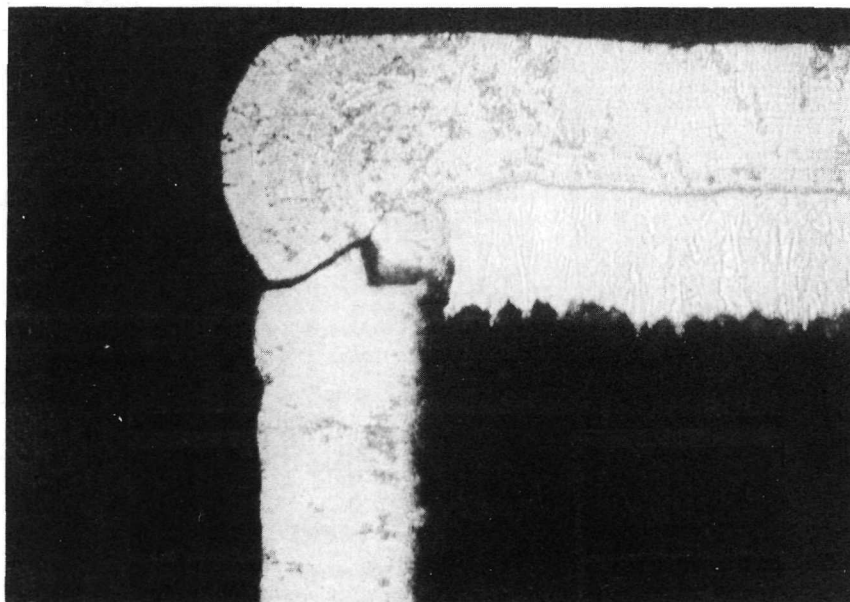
Photomicrograph (500X) of a Cross Section of Plated-Through Hole in Figure 55 Enlarged to Show Details of One Crack Defect.
